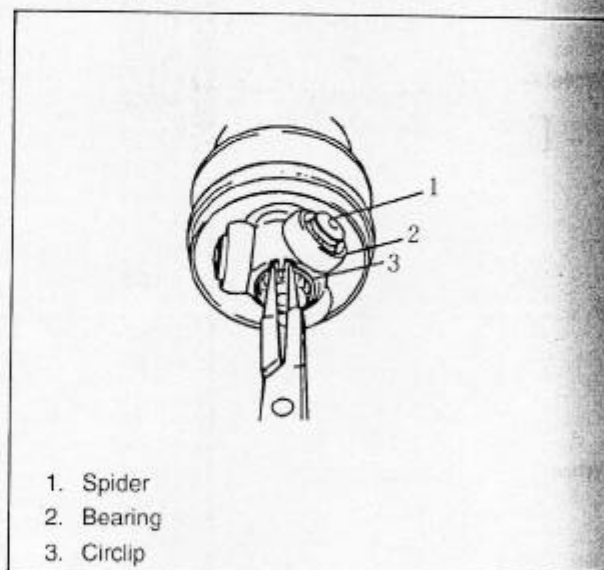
4 REMOVING CIRCLIP (TRIPOT JOINT TYPE)
